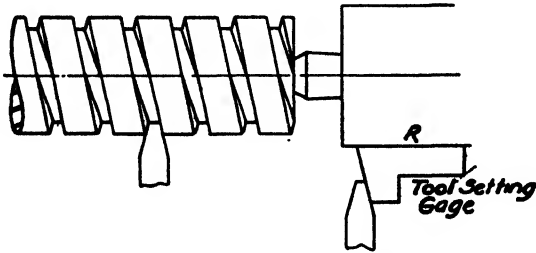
Cutting a Double-threaded Acme Screw—First Operation.
